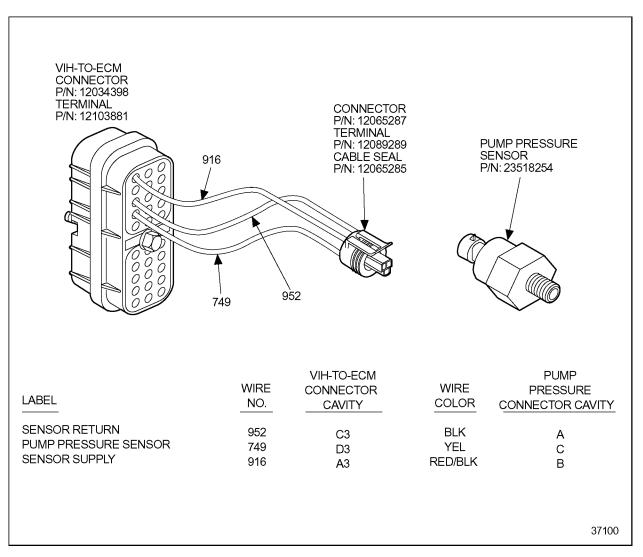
Fire Truck Pump Pressure Sensor Installation
